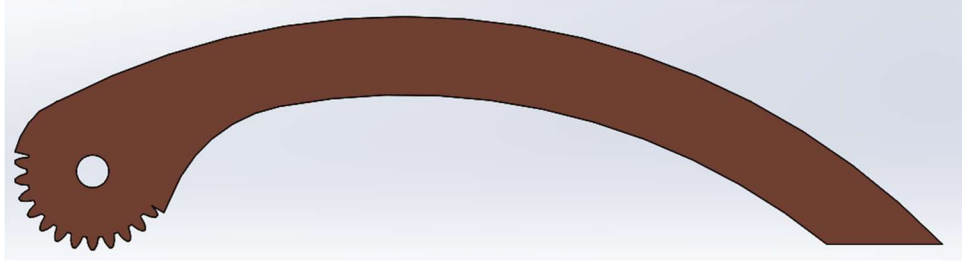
Side view of one piece of the three identical used to form one claw. The gear aligns with the three-sides rack mounted to the linear servo to open and close the claws.
